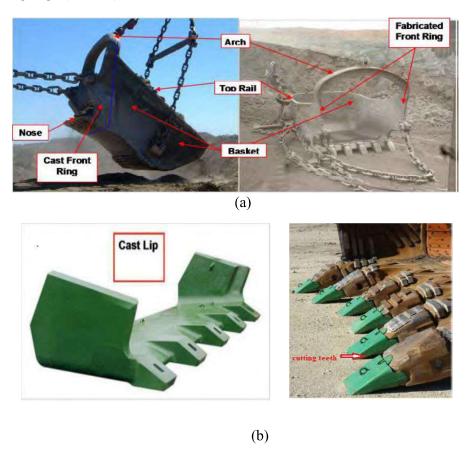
4: Bucket assembly and their parts (a) Mains parts (b) Cast lip and teeth (Dragline Dictionary Edition, 2014)
